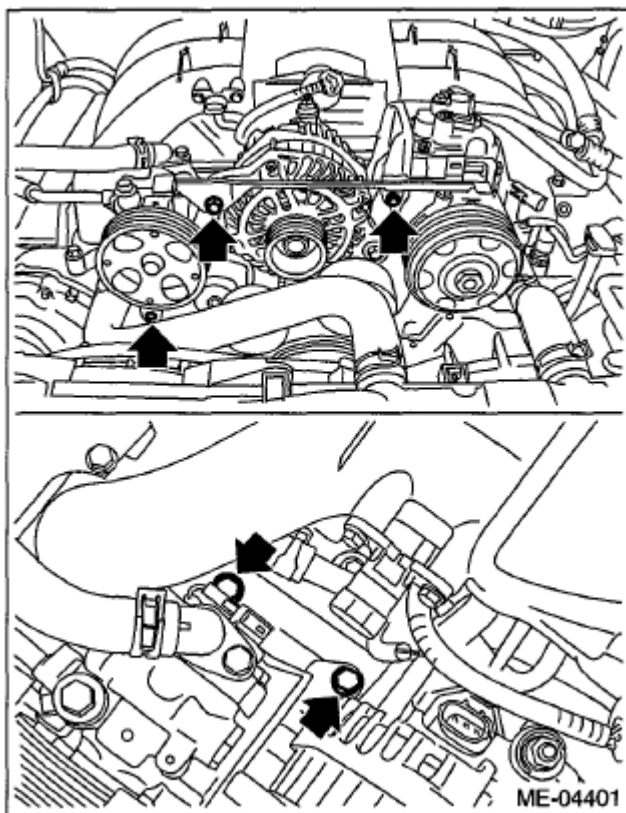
Locating Collector Cover Bracket And Power Steering Pump Bracket Mounting Bolts
